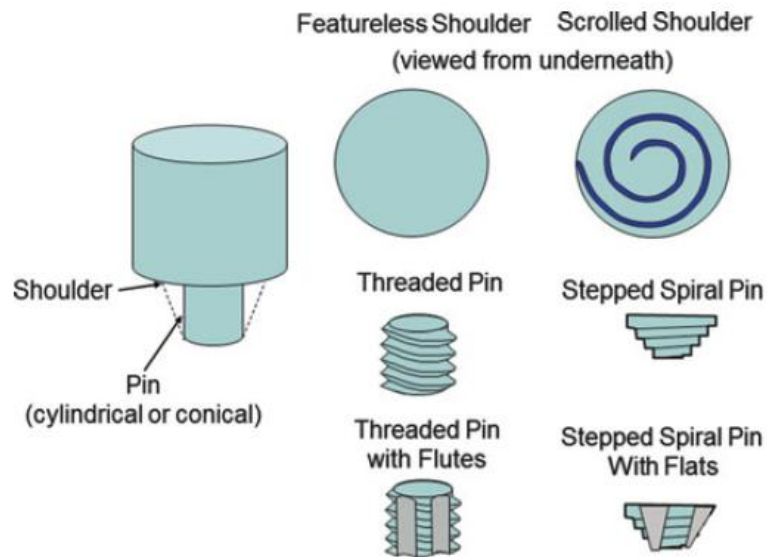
5 Common tool shoulder and pin features [39], [47].
